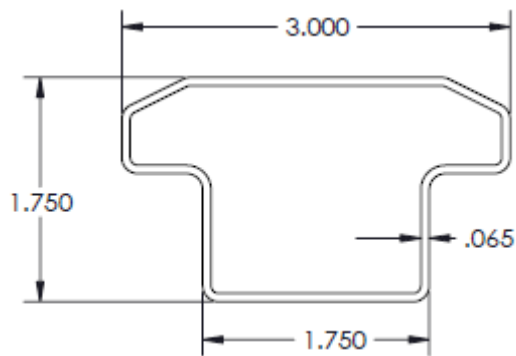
GUARDRAIL COMPONENT PROFILES
